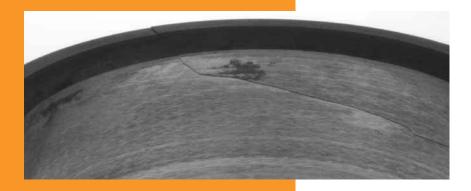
This ball bearing inner ring fracture results from installation on top of a metal contaminant or raised metal nick.
